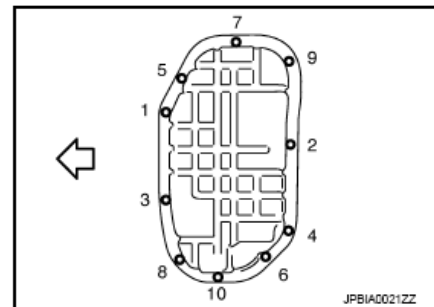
Identifying Tightening Sequence Of Lower Oil Pan Mounting Bolts
